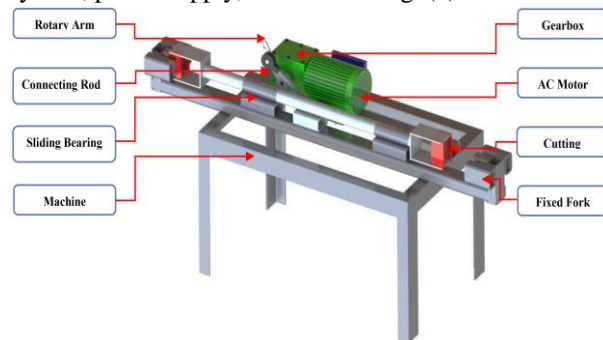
The main components of the prototype sugarcane seed cutter machine.
